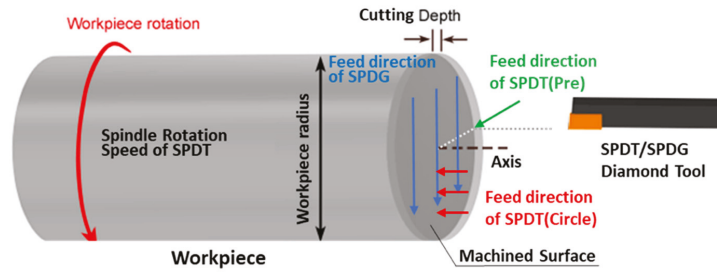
Processing principle of SPDT and SPDG. In the preliminary process of SPDT(Pre), the workpiece turns at a high cutting speed, and the diamond tool feeds in the radial direction until the machined surface becomes smooth. For the concentric circle groove processing in SPDT(Circle), the workpiece keeps spinning, and the diamond tool remains stationary after every certain position of feed direction of SPDT(Circle). For the parallel straight groove processing in SPDG, the workpiece remains stationary and the diamond tool feeds in a series of parallel and equally spaced radial directions.
